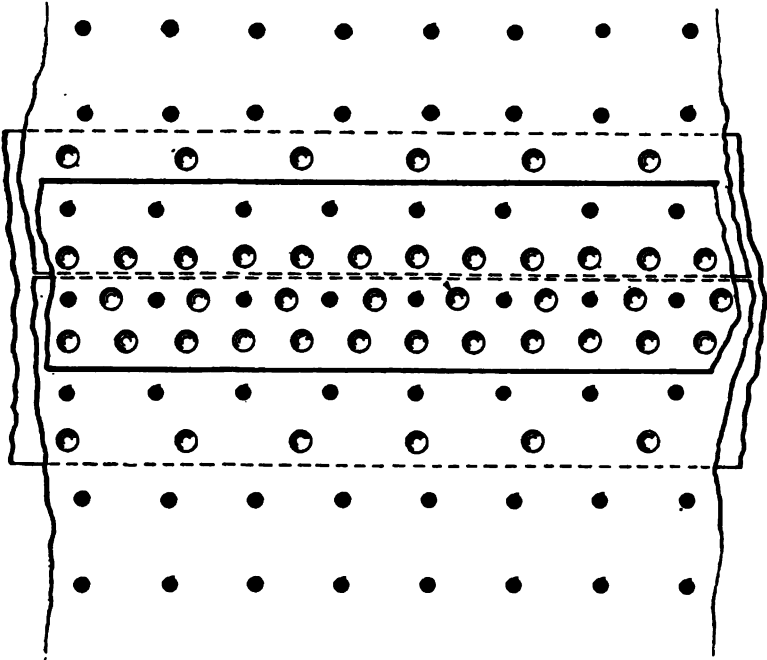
Double-riveted Butt-strap of Unequal Width on a Stayed Sheet.
